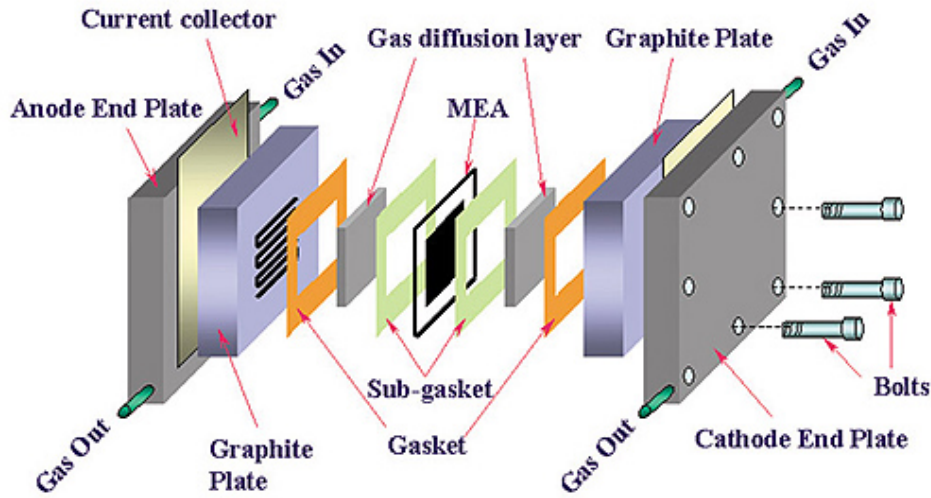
Exploded view of PEM fuel cell stack [64].
